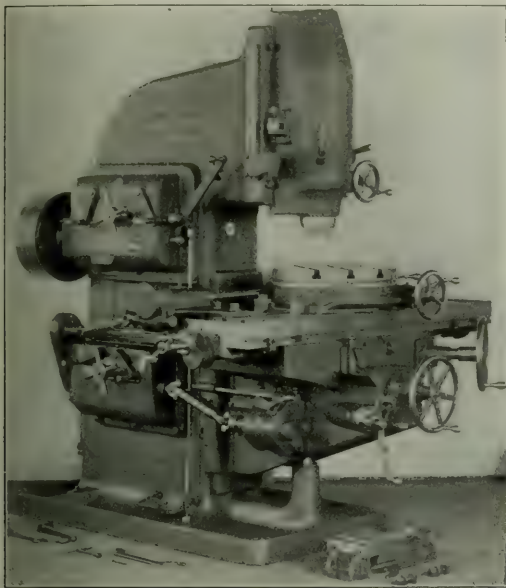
Cincinnati Vertical Spindle Milling Machine Showing Location of Gear Boxes.
